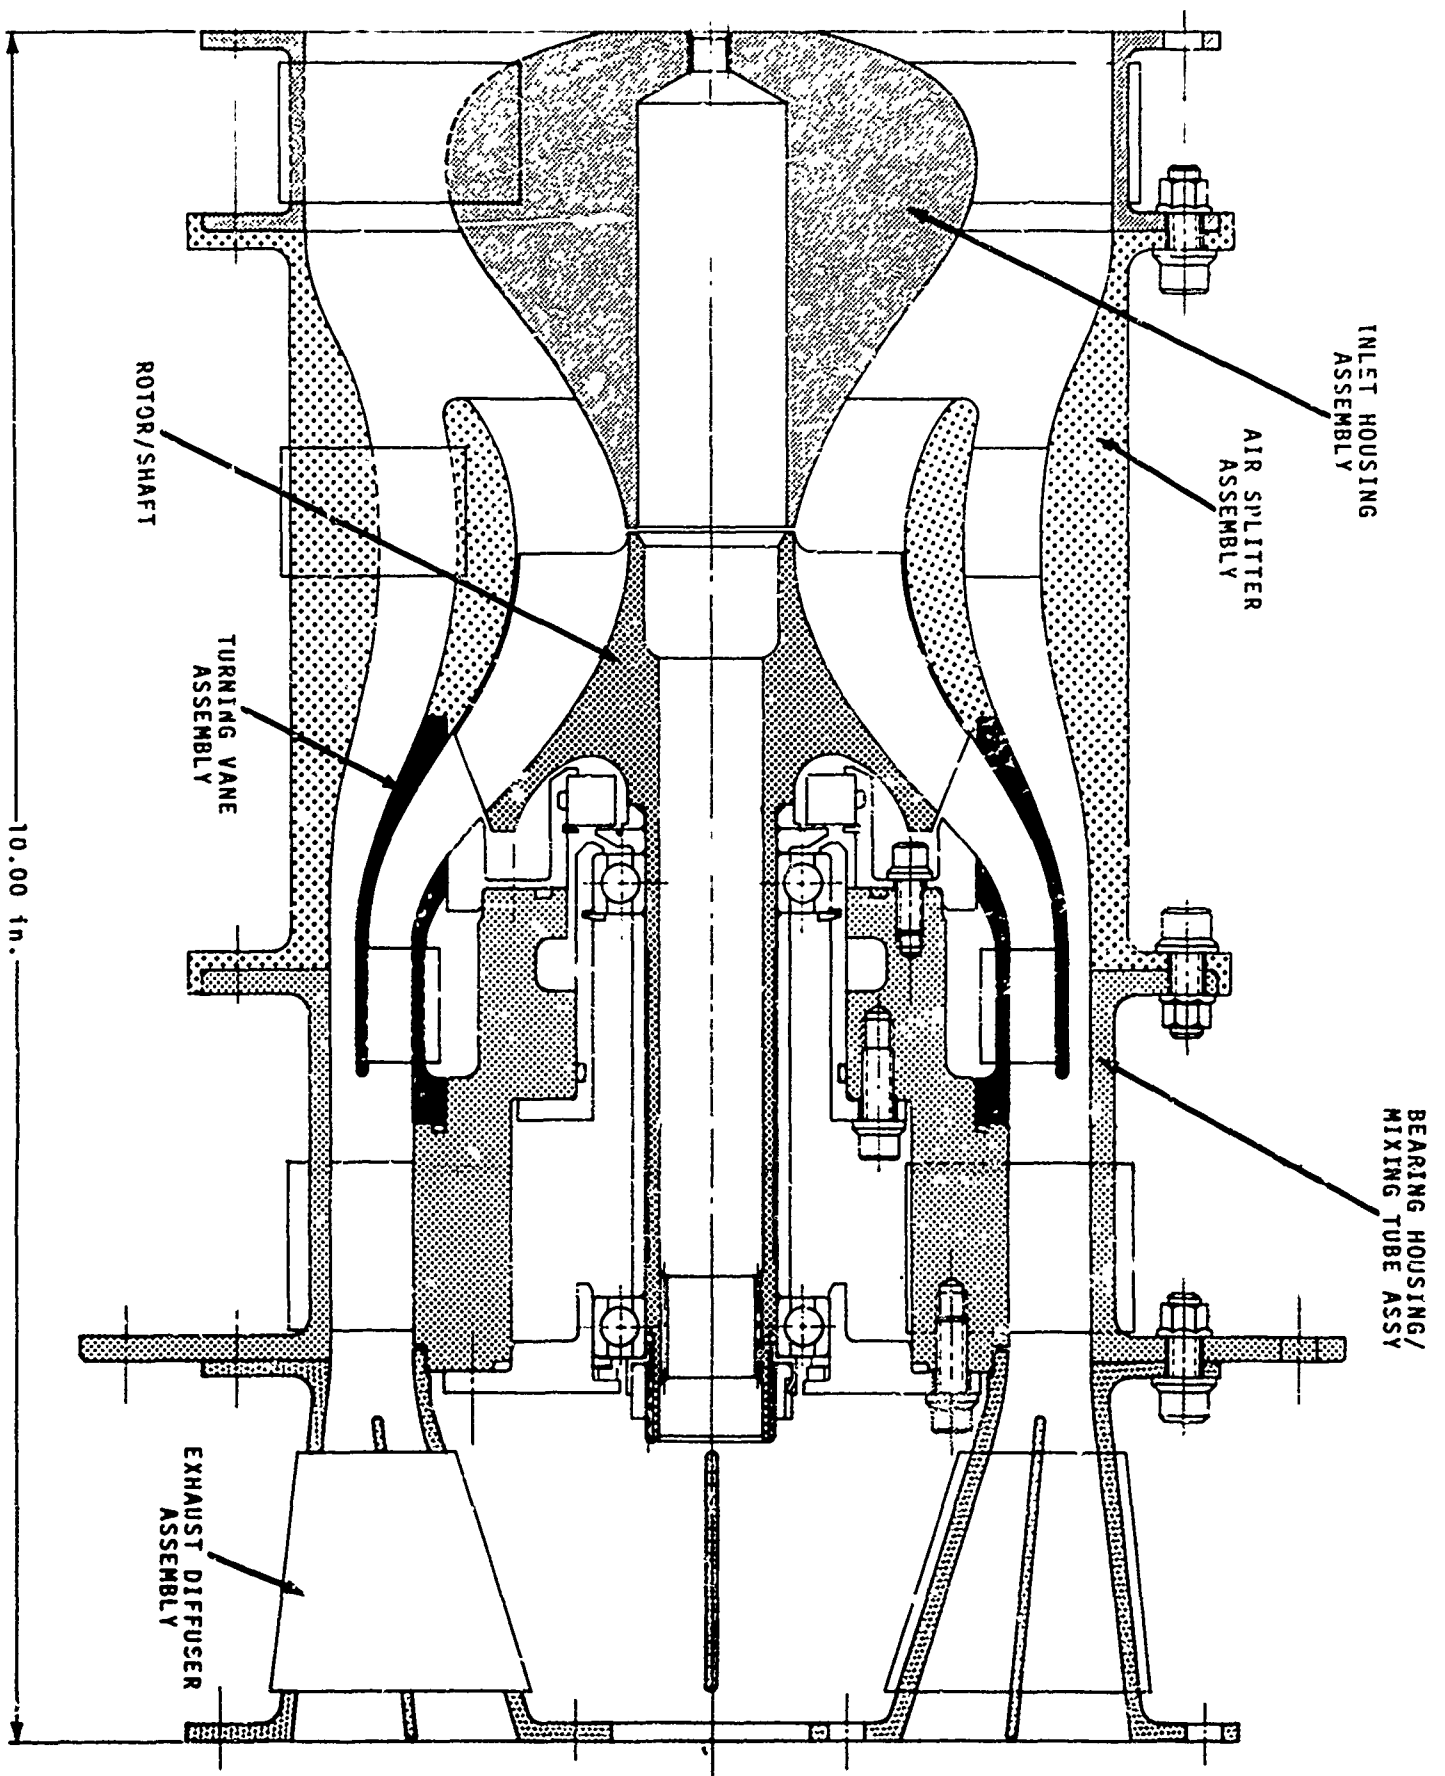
Final Design Assembly - System D1 (Bypassing Scavenge Blower).
